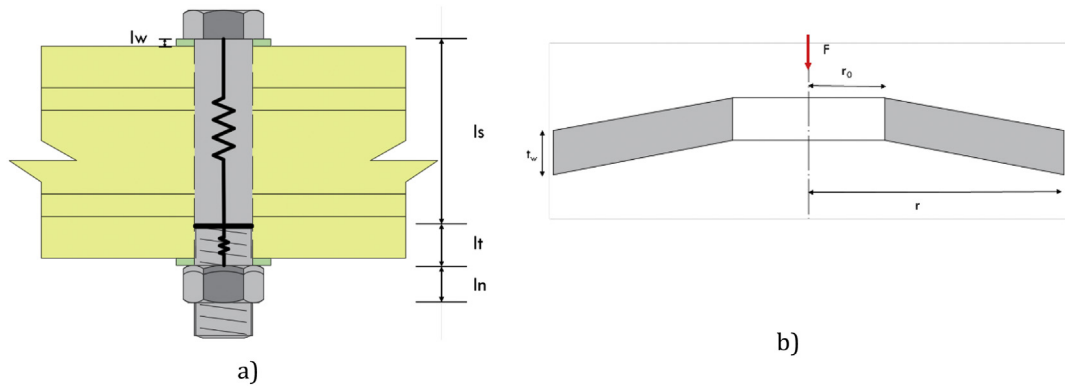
a) spring model of the Bolt; b) Geometry of the Belleville washers.
